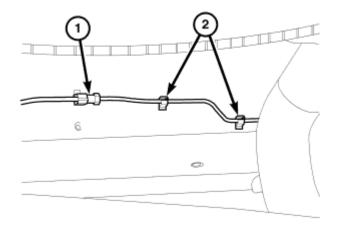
Identifying Brake Hose/Line Mounting Bolt & Line/Hose Courtesy of CHRYSLER LLC
